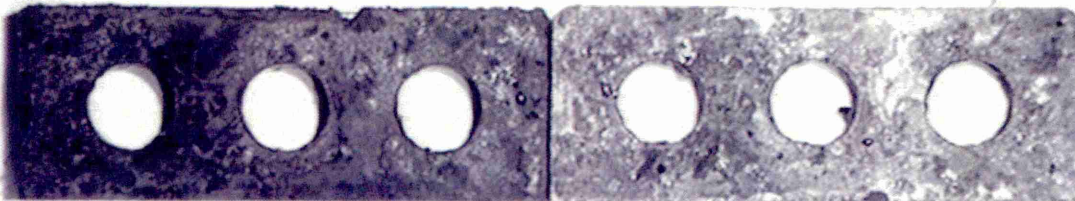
Alumina grit blast + CP30 fracture surface after environmental exposure
